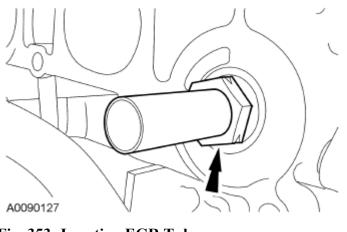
Locating EGR Tube Courtesy of FORD MOTOR CO.
